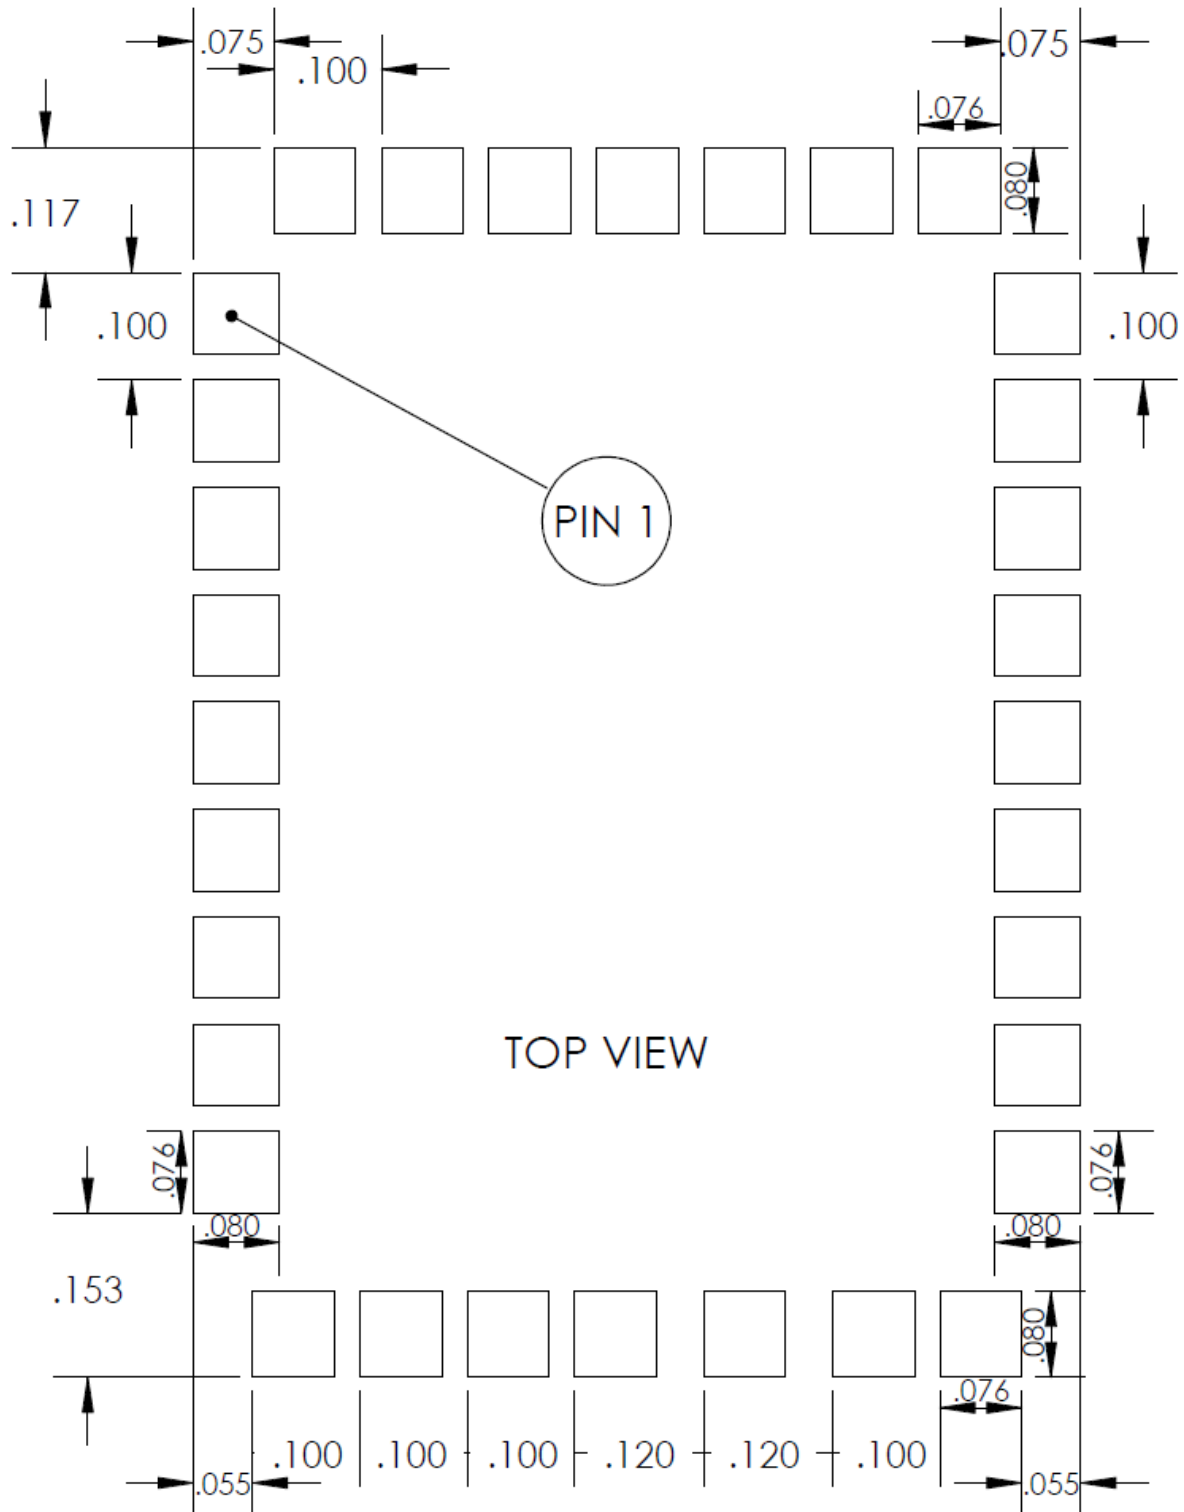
Recommended PCB footprint layout (dimensions in inches)
